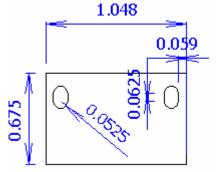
Optical encoder mount which attaches to the right-side motor mount (all in inches)
